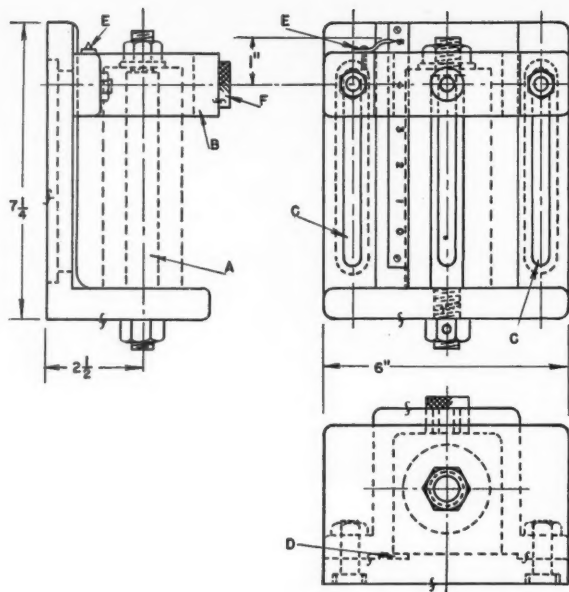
Drawing of universal type drilling jig which is designed for use in drilling and tapping holes in machine steel collar.
